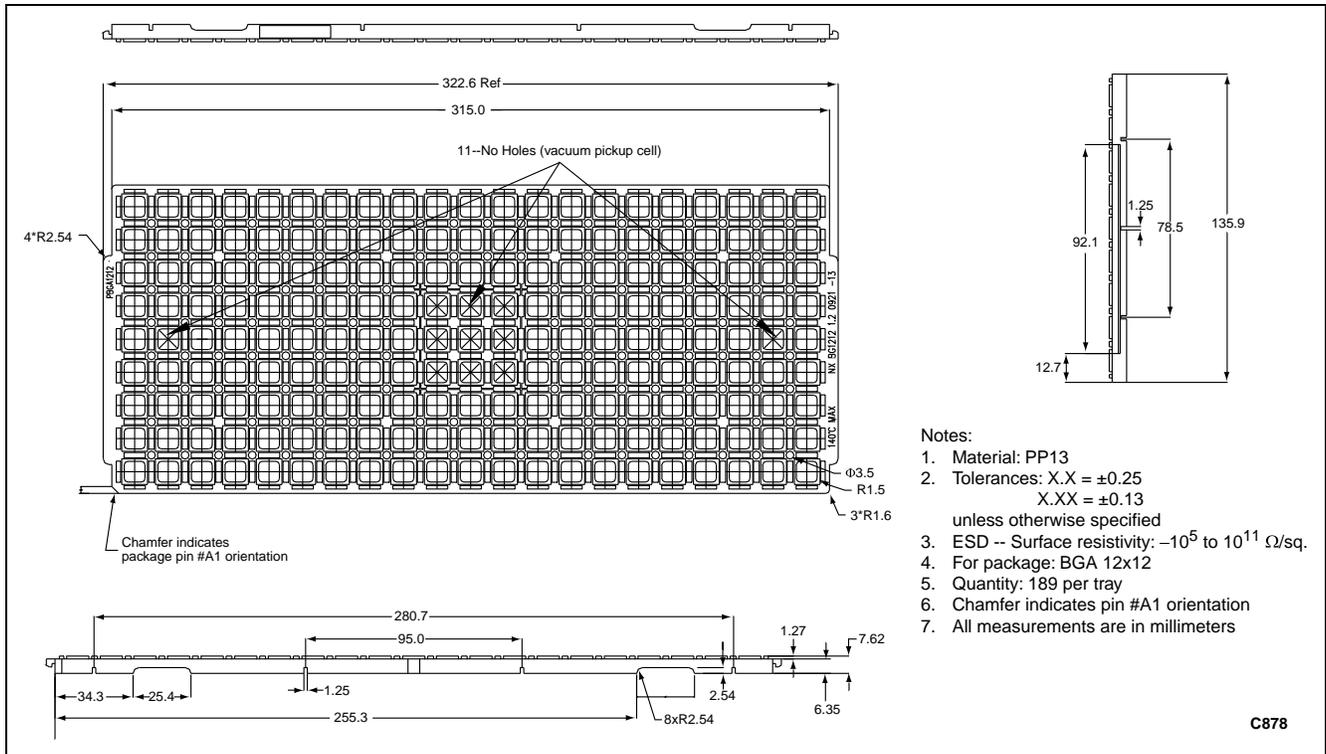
BP 160-Pin μ BGA Shipping Tray Dimensions
